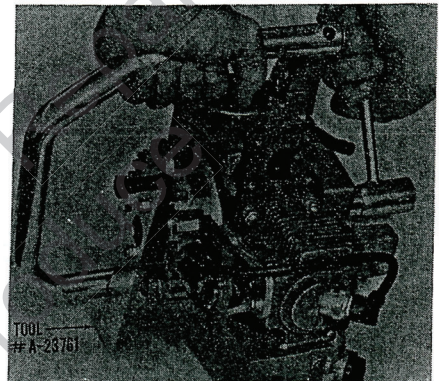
Using Homelite tool No. A-23761 to keep crankshaft from turning while removing clutch retaining nut and clutch rotor. Homelite tool No. A-23696 is used to remove or install clutch rotor.
